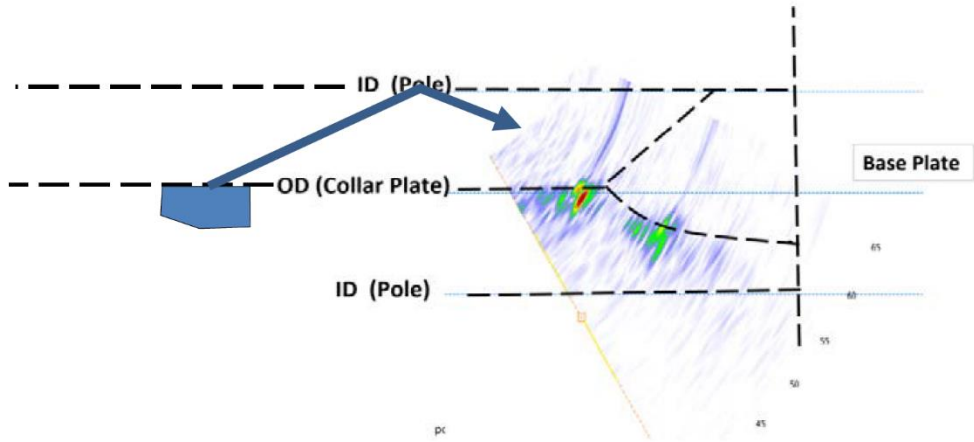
Scan of the Collar to Baseplate Weld
